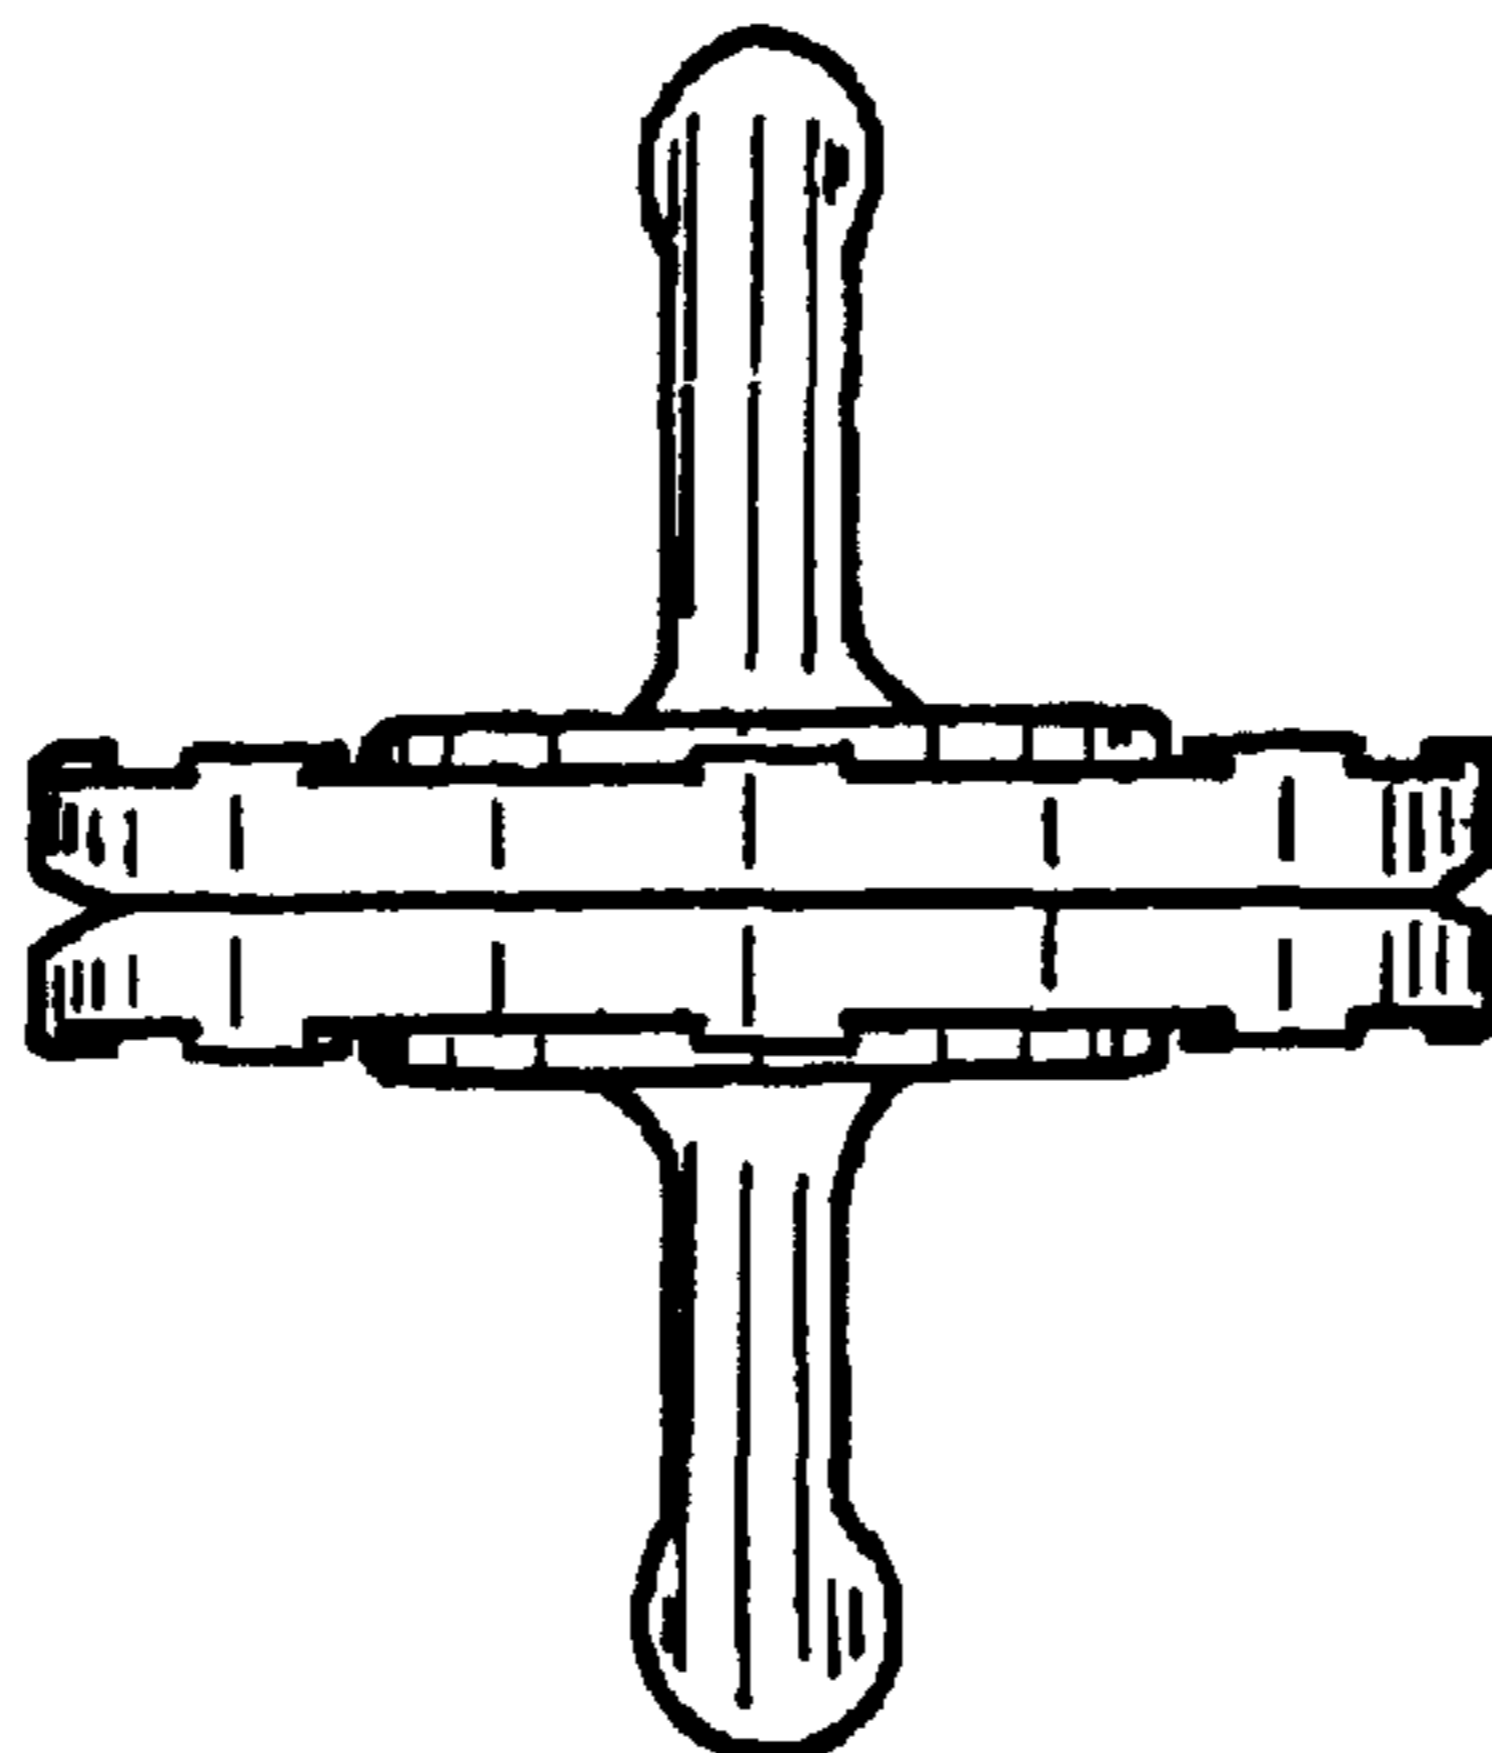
is a front elevational view of the front member of FIG. 12, shown with the rear member removed, the rear elevational view being identical;
